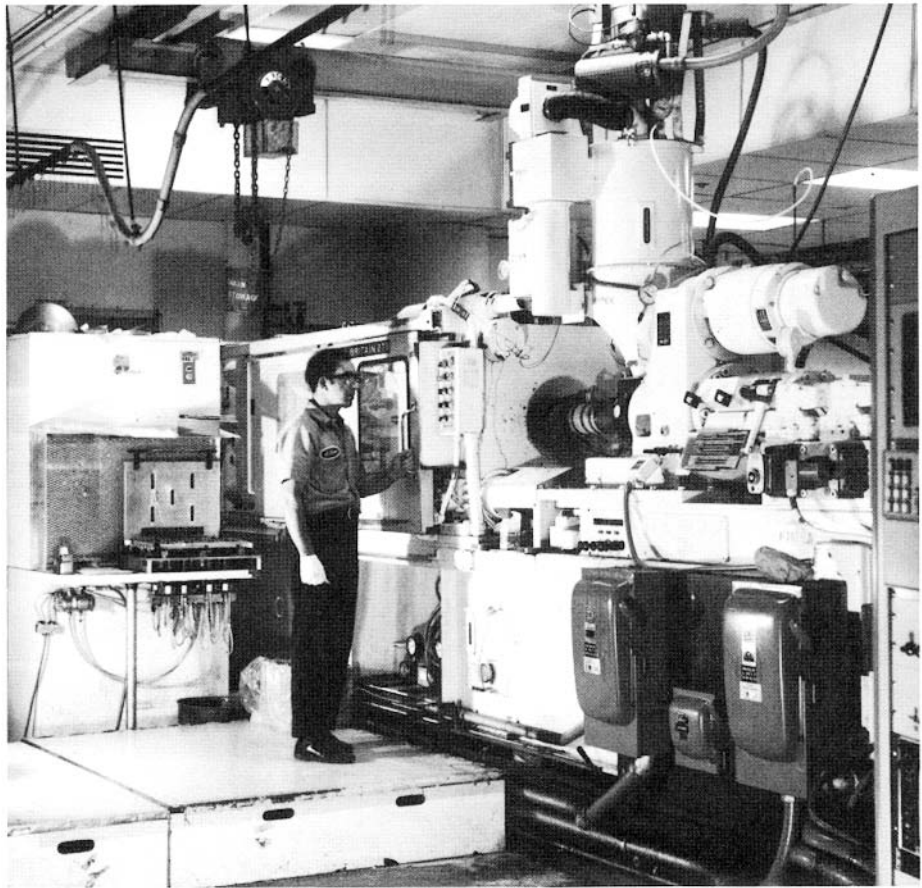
A 275-ton clamp, 6-ounce horizontal injection molding machine set up to produce optical elements.
